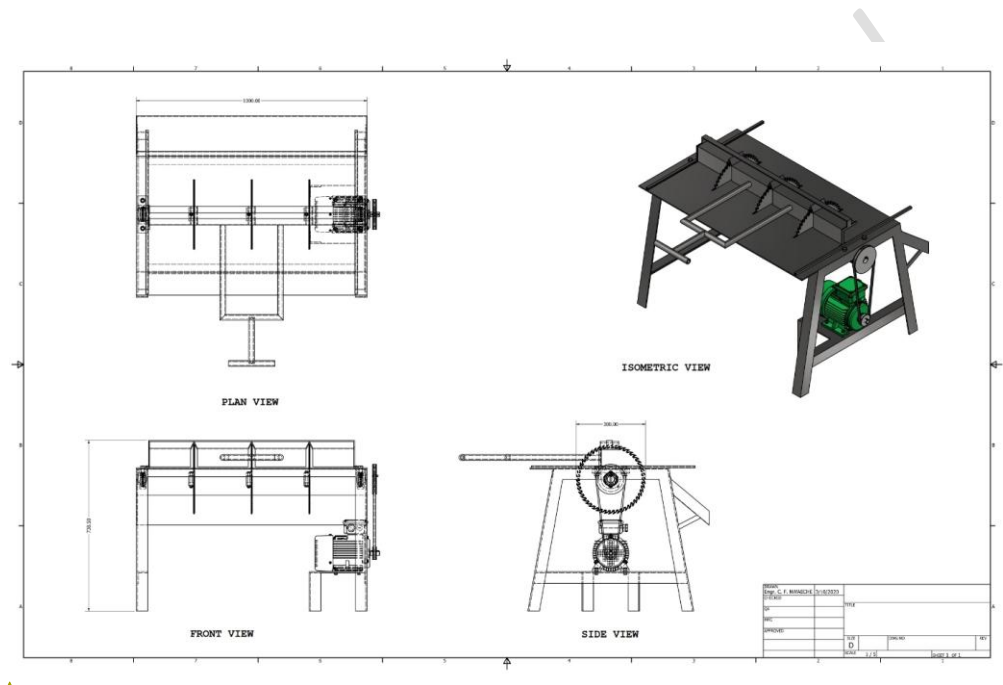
Orthographic view of the 3-blade cassava cutting machine
